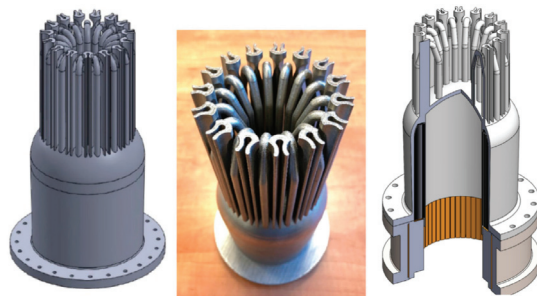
View of the Stirling engine head designed for operation with a solid fuel boiler [77,81].
